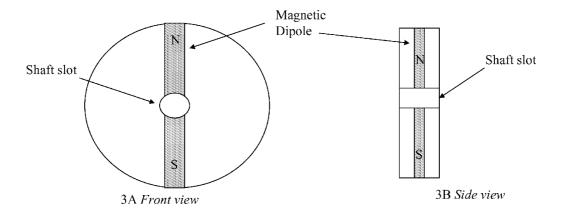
Advanced flywheel –conductor assembly (using magnetic-dipole)
